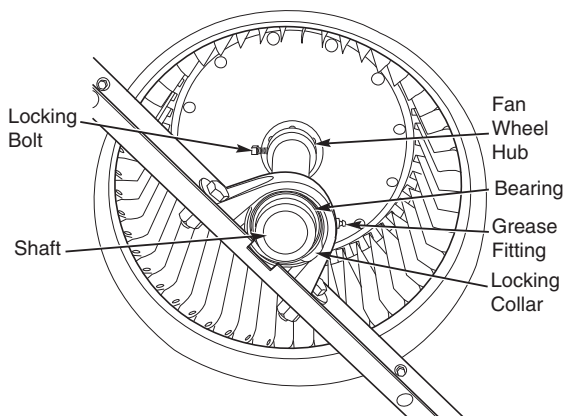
Fan Shaft, Bearings, and Fan Wheel (Typical)
